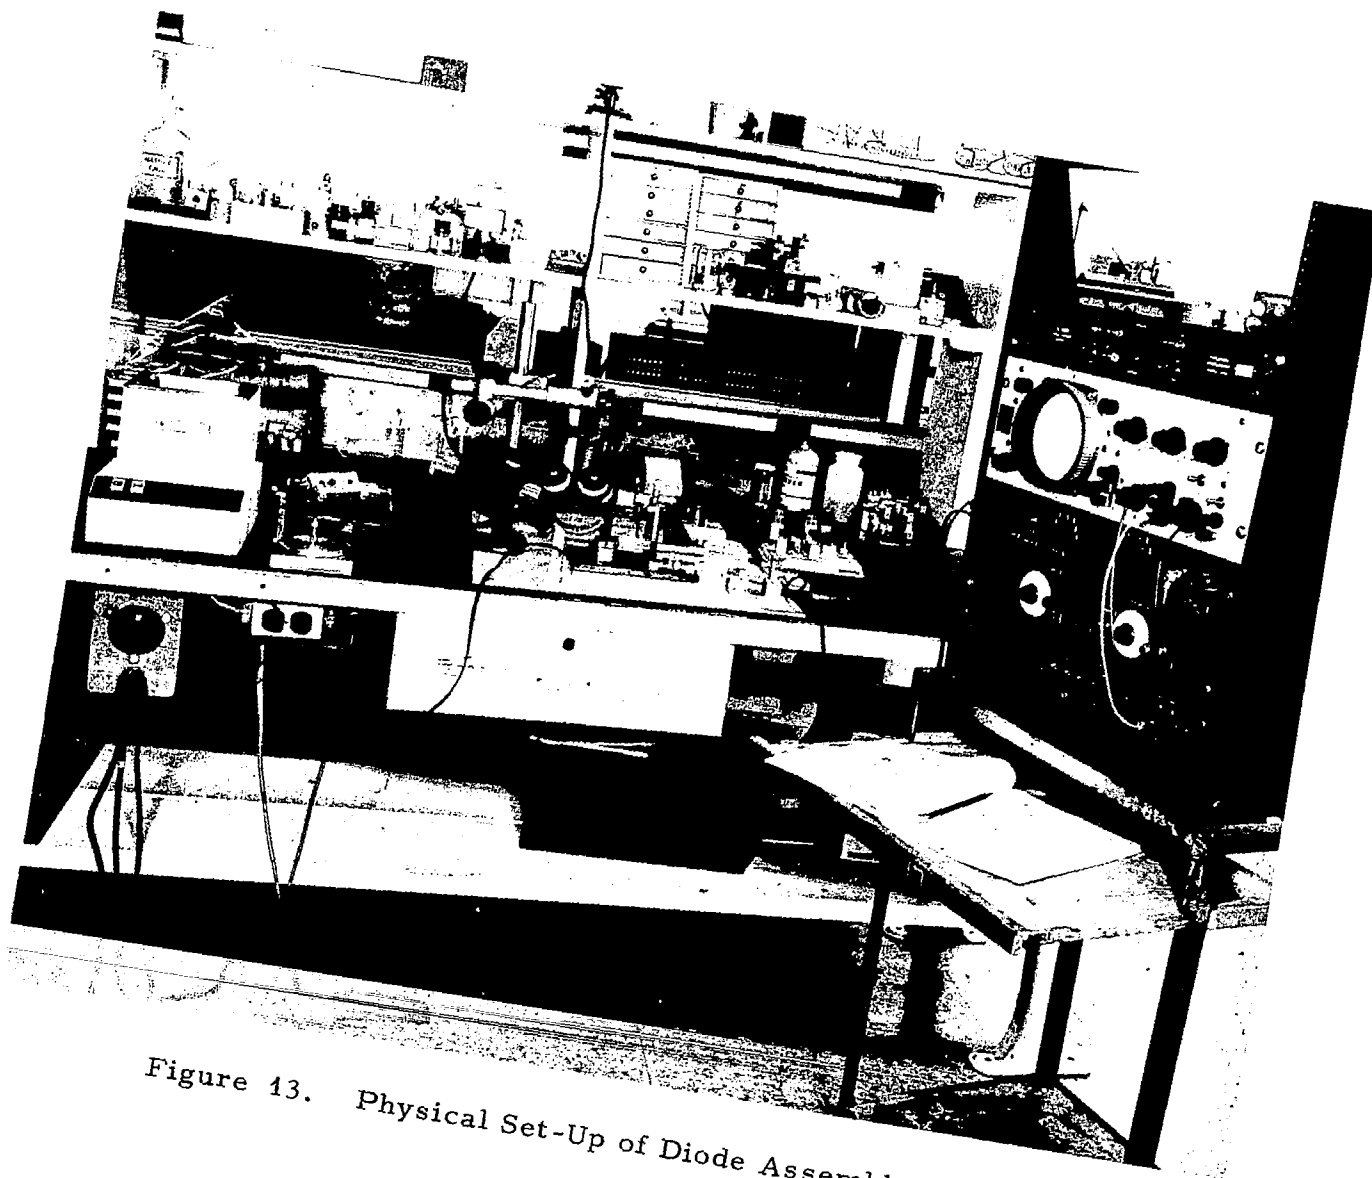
Physical Set-Up of Diode Assembly Apparatus
